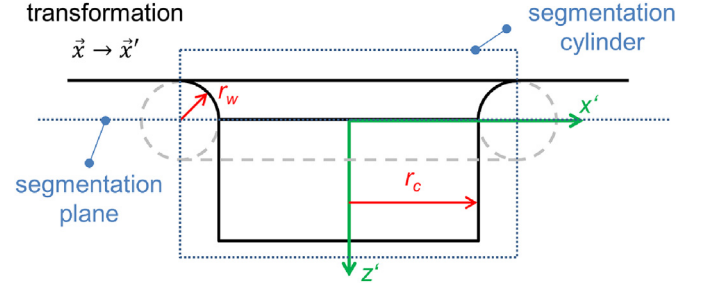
Drawing die composed from geometric primitives in the workpiece coordinate system (WCS) with segmentation elements according to the geometric model.
